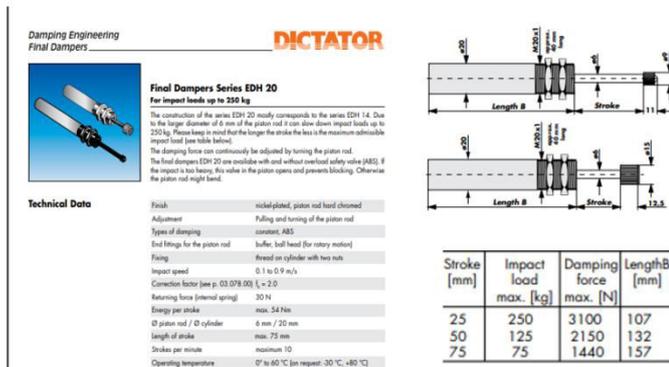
Dictator Technik-Selecting the Right Damper Catalogue
